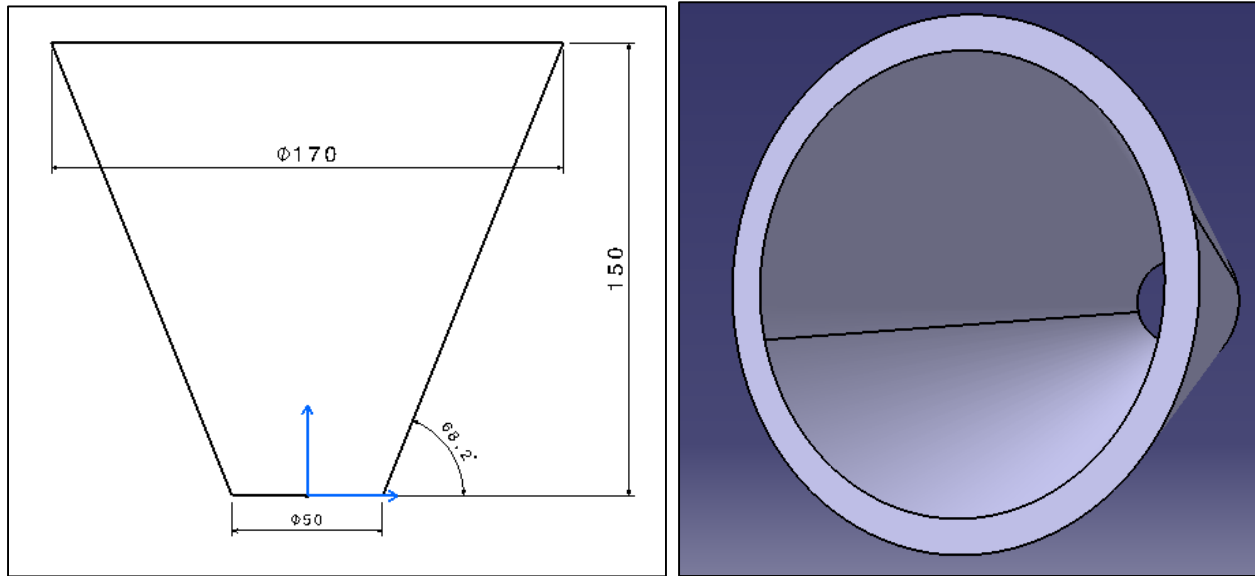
Hopper design. Left: Front view of Hopper (dimension in mm) Right: 3d model view
